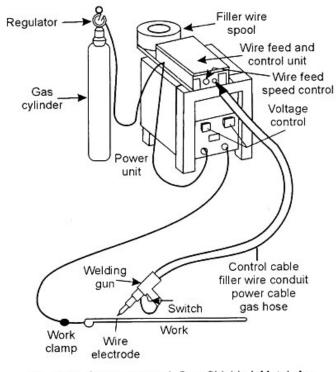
Components of Gas Shielded Metal Arc Welding Process
